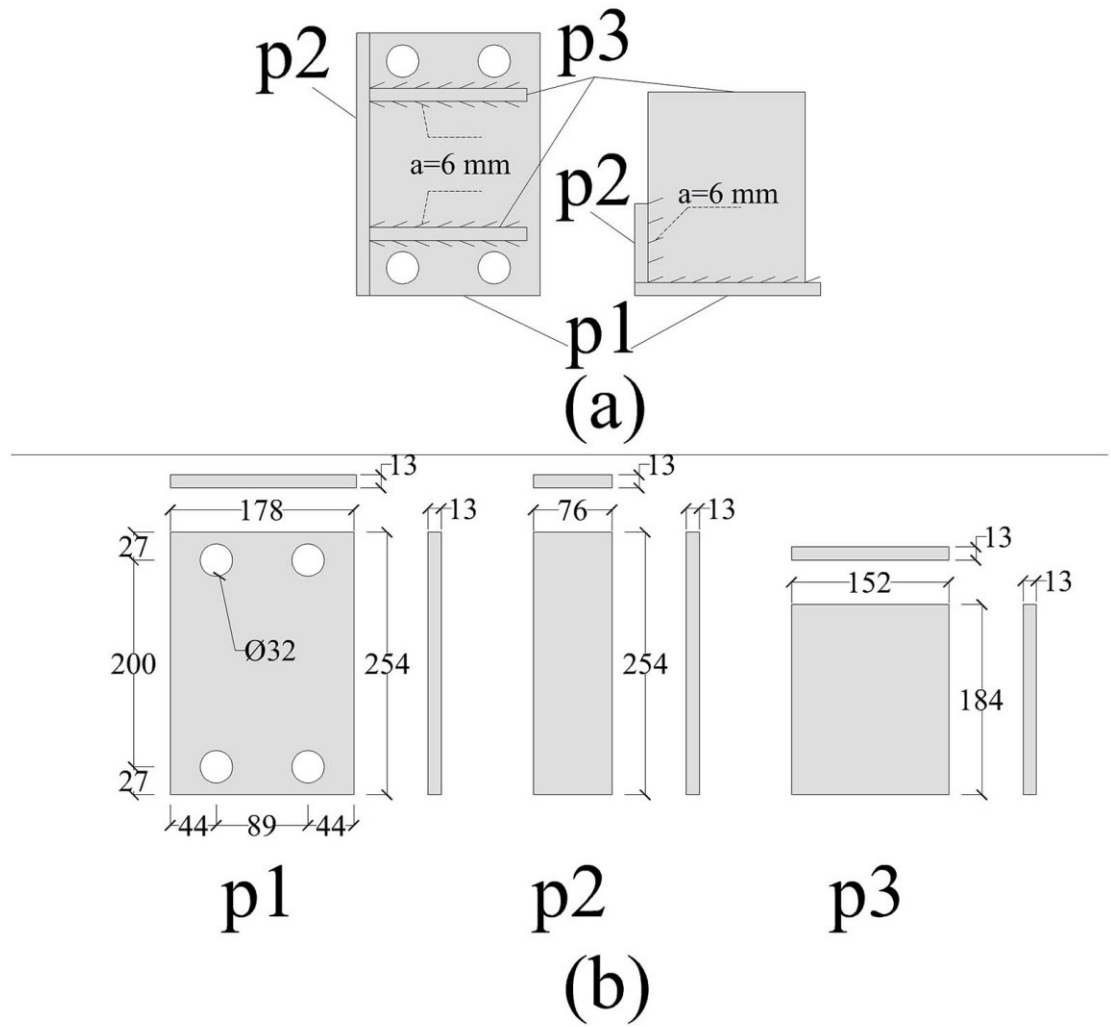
sliding steel support used in shearwall-level test set-ups (S₁): (a) assembled support and (b) step plates used in the assembly
